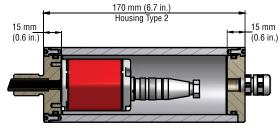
Model RS Rod-style sensor dimension reference (shown with Type 2 housing)
